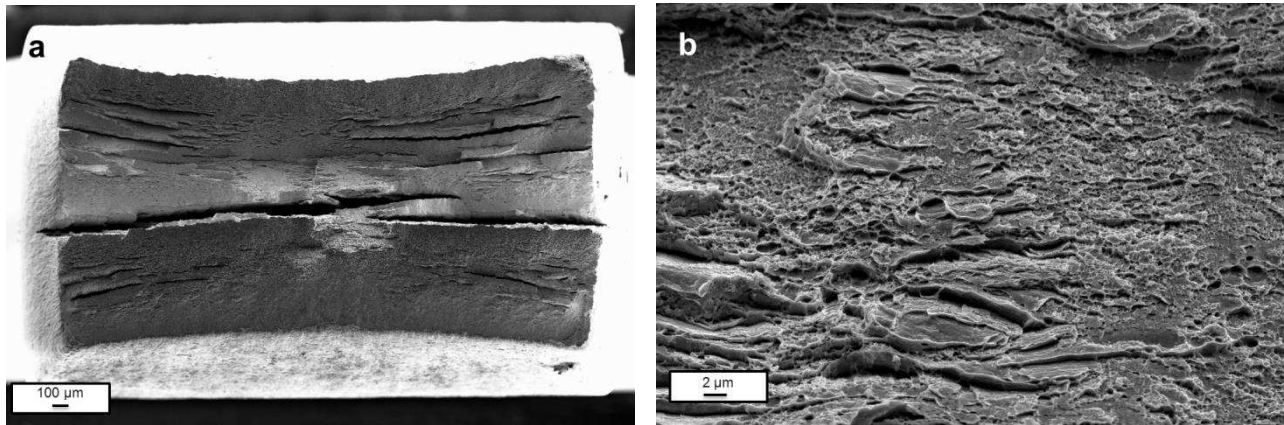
(a) Fracture surface of reference specimen tested in air, and (b) magnification of tearing and dimples in a ductile region,
